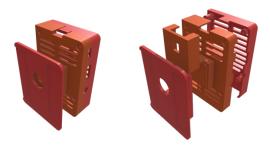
Final design of assembly (left) and expanded view showing each component of the assembly (right).
